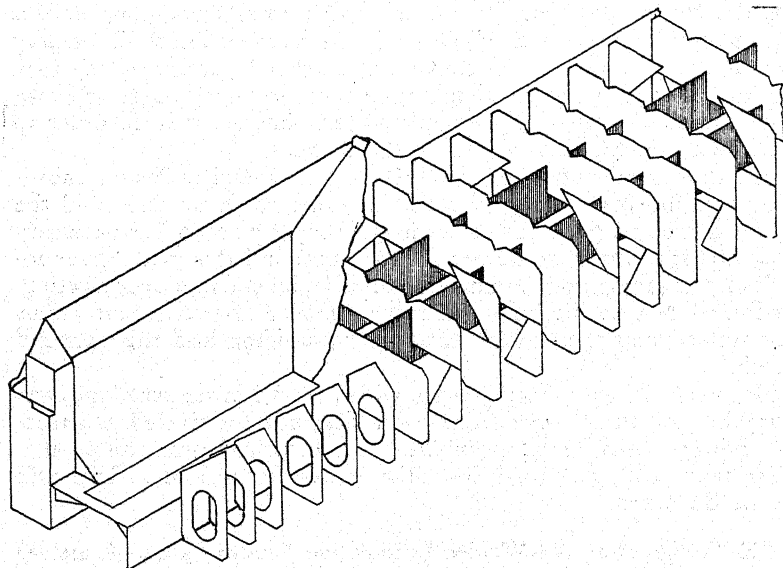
Isometric sketch of complete baffle system of arc welded tender tank.
